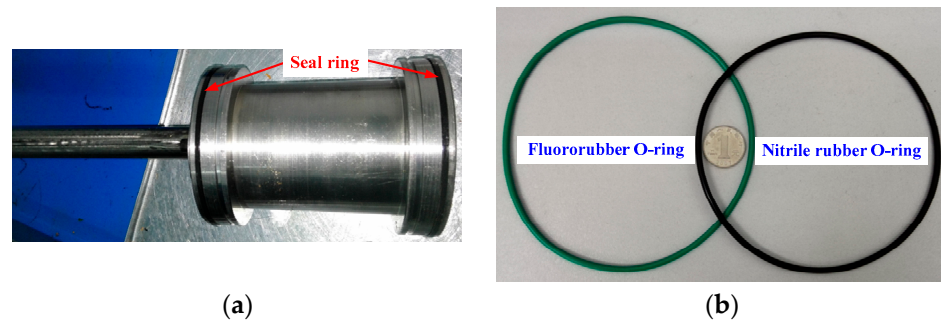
Piston rod and tested dynamic seal rings. (a) Piston rod; (b) tested dynamic seal rings.
